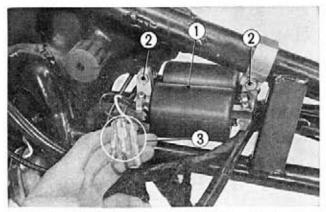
① Ignition coil ③ Leads connectors ② Mounting bolts
